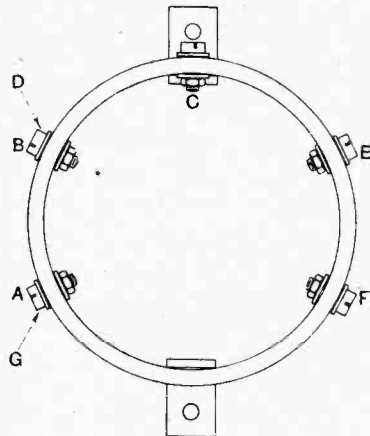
Plan of cylindrical former for H.F. transformer. Terminal screws A, B, and C are on the upper edge.
